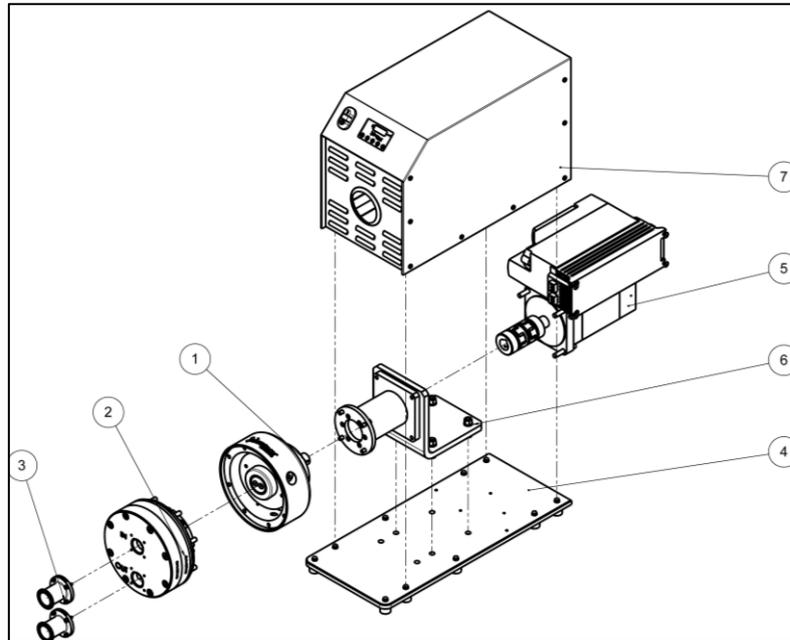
Sub-assemblies QF5K-HT - QF5KHT-ACUEGNT
